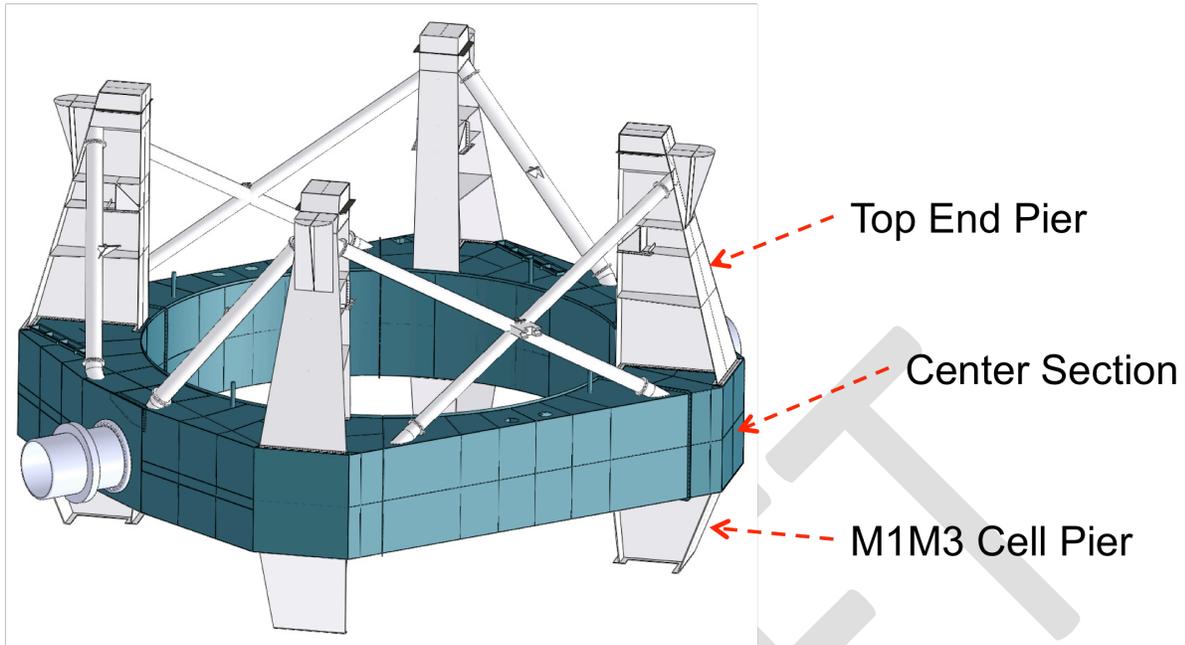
Elevation Assembly Center Section with Piers.
